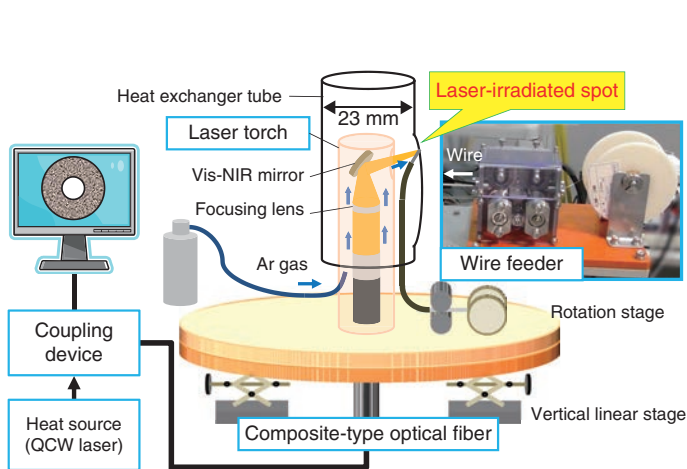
Schematic view of laser cladding system in heat exchanger tube
